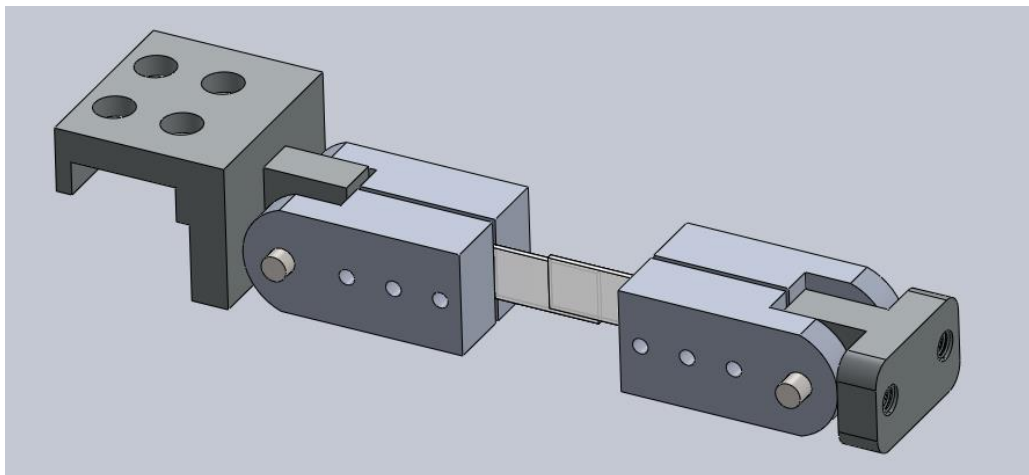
CAD design image of the unsupported test rig design where the polycarbonate lap joint (white) is permitted to bend during testing. Image taken from Solidworks CAD software.
